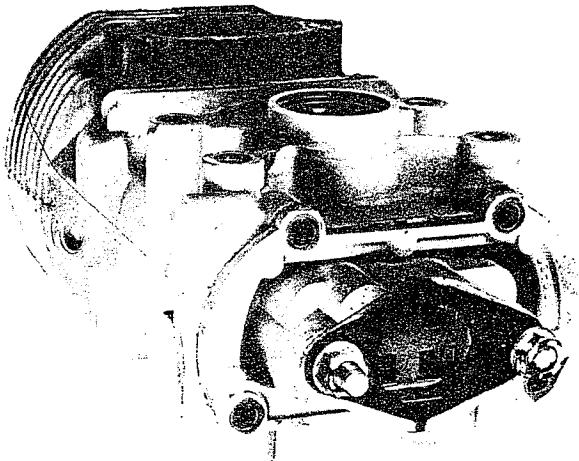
Crankcase for a two-stroke-cycle engine.
